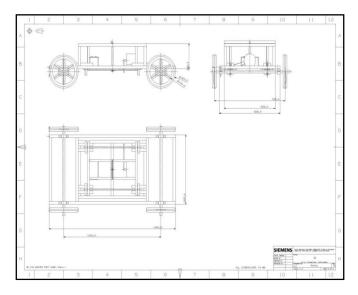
Dimensional View of Project vehical (NX-CADD)
